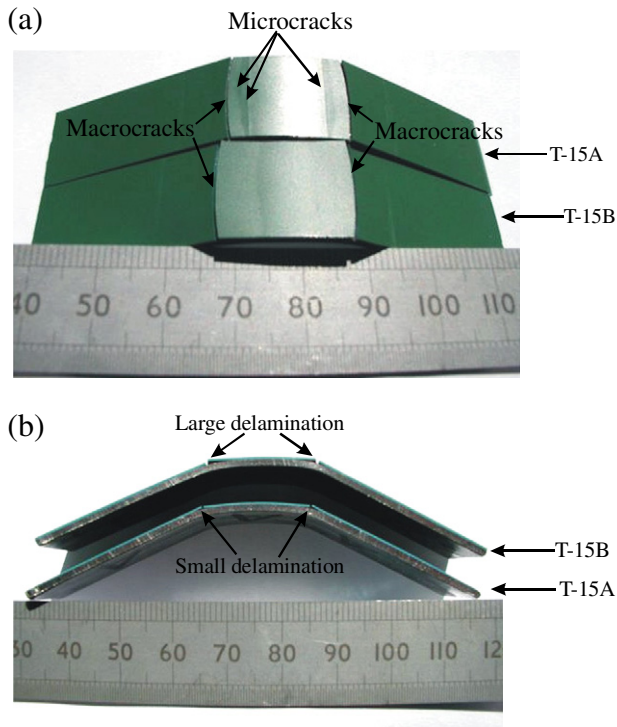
Top and side views of the thermoset coatings T-15A and T-15B after testing. (a) Surface of coating specimens T-15A and T-15B showing two macrocracks on the surface of T-15B and two macrocracks with three microcracks on the surface of T-15A. (b) Side view of coating T-15A and T-15B showing differences in the size of the delaminations found in the two coatings after testing.
